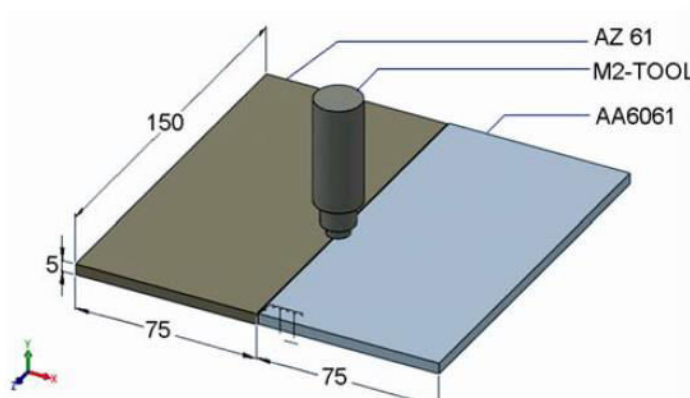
Schematic illustration of Friction Stir Welding of dissimilar alloys AA6061-AZ61.
